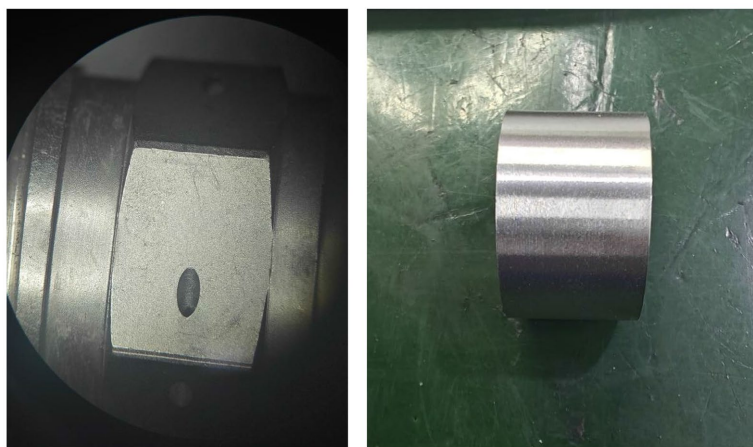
Surface appearance of the injection-molded specimen (left) and the surface appearance after turning and polishing (right)
